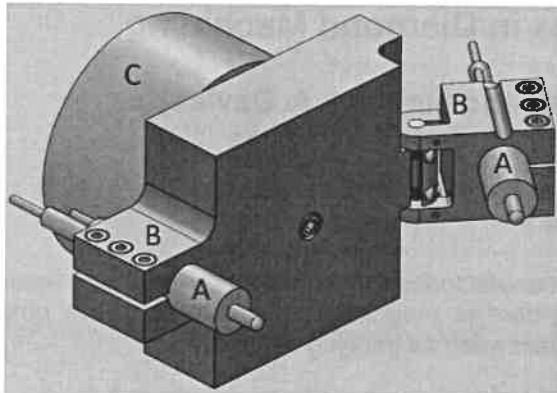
SolidWorks Solid model of the C-LVDT Toolset Station. (A) C-LVDT probes, (B) Probe Mounts, and (C) Spindle Adaptor
